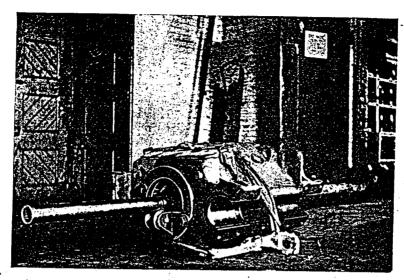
Removing an Armature by Means of an Extension of the Armature Shaft Supported by a Roller in a Bracket Bolted to the Frame
